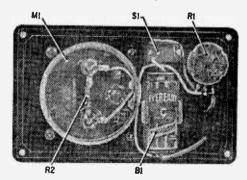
Internal view of Mini-Ohmer is uncluttered since few parts are actually needed to assemble this low-resistance-measuring instrument. All are on cover.
